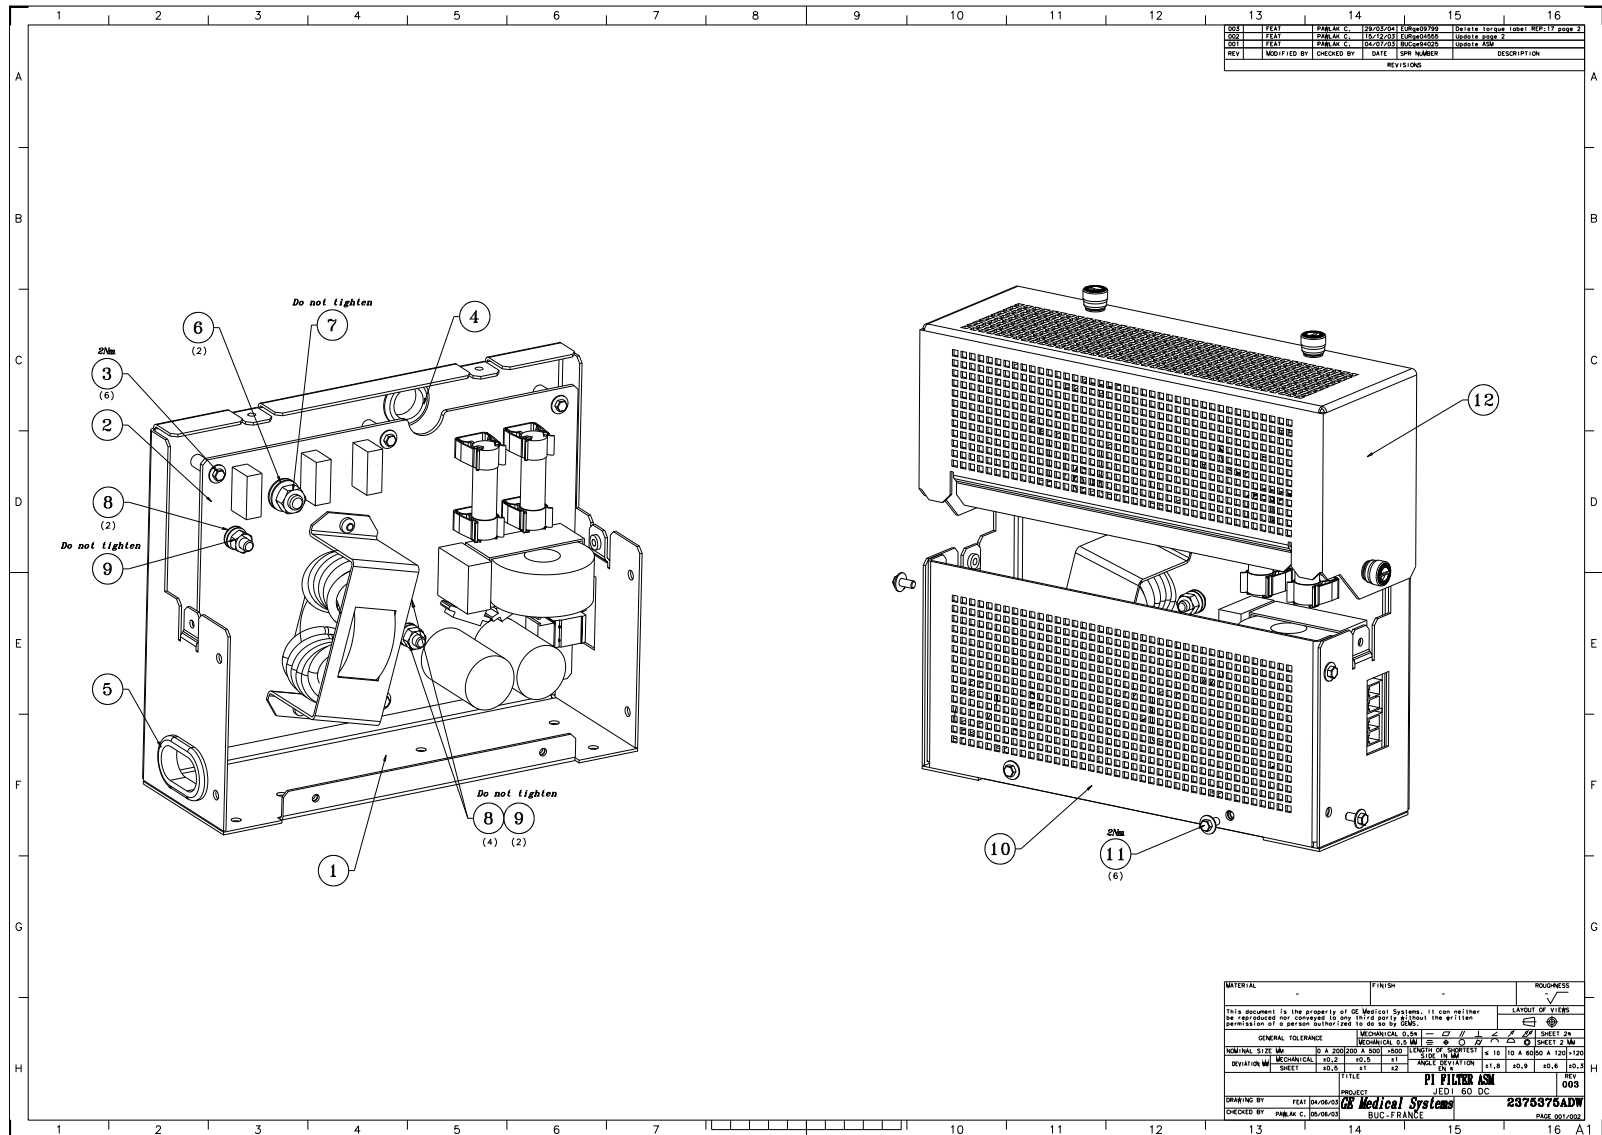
PI FILTER ASSEMBLY (2375375 Sheet 1, Rev 3)
